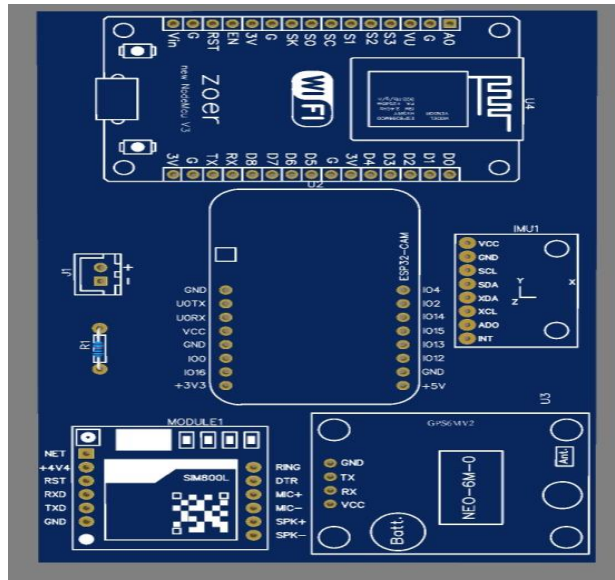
Bottom layer PCB of the health monitoring watch.
